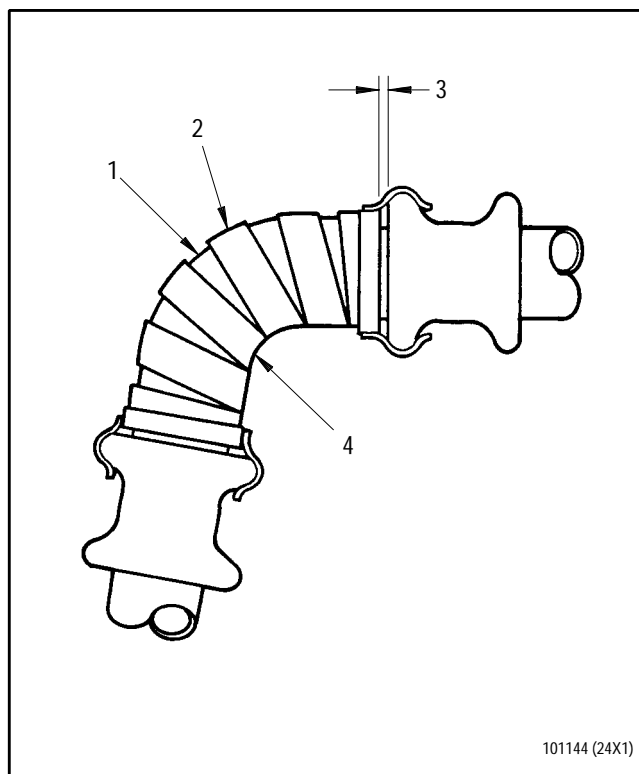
No. 4 Bearing Left Internal Scavenge Tube Assembly - Thermal Heat Barrier Coating Replacement
